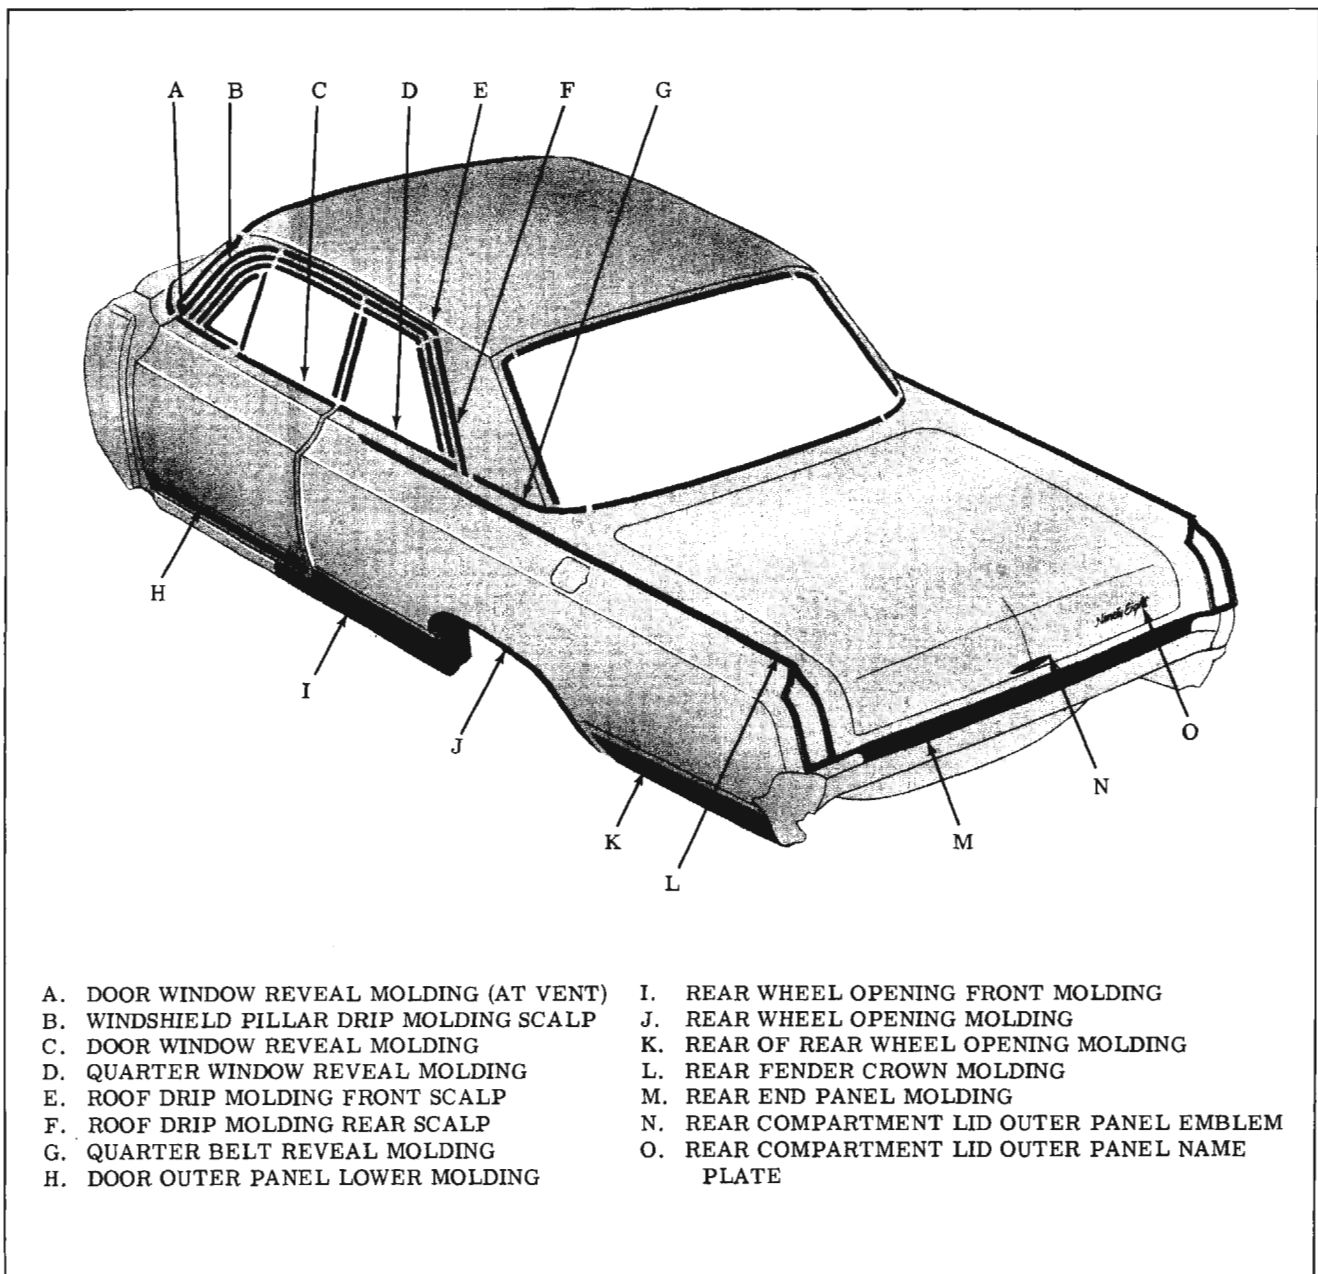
Exterior Moldings (3847 and 3947 Styles)
